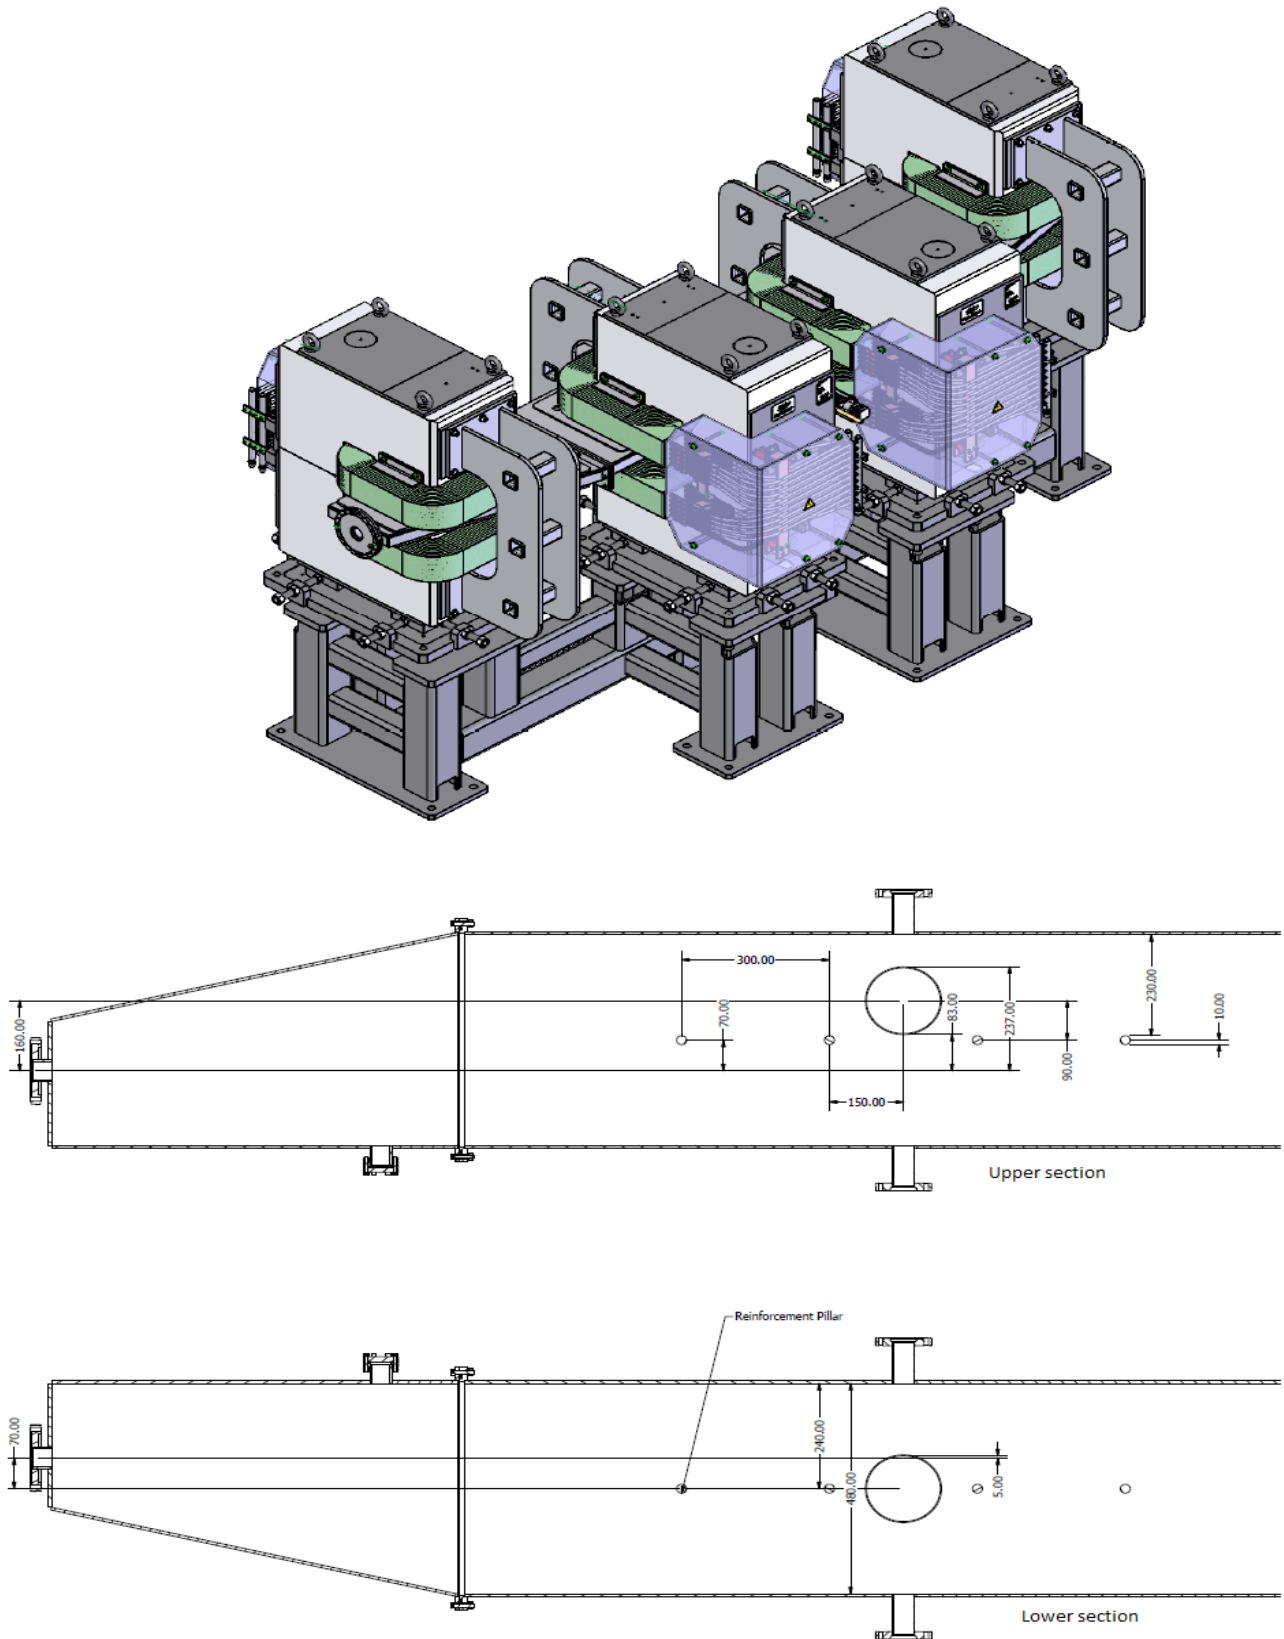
ESS design (upper side) and technical drawing of vacuum chamber (lower side)
